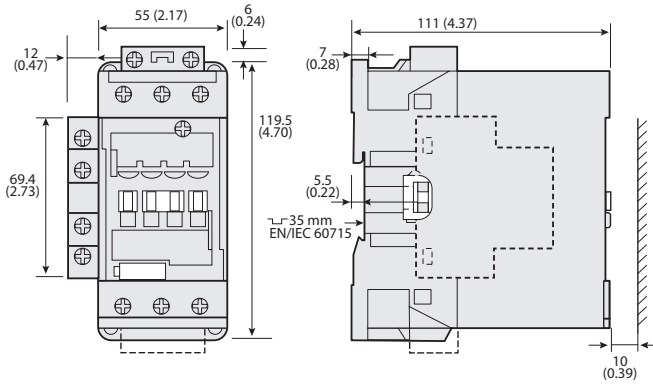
104-E40...104-E65 Reversing 3-Pole Contactors
